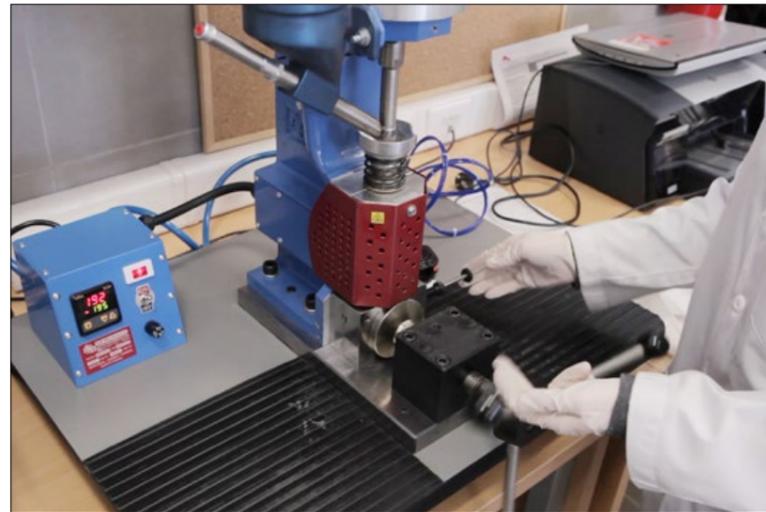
Low pressure powder injection moulding on equipment from A B Machinery
